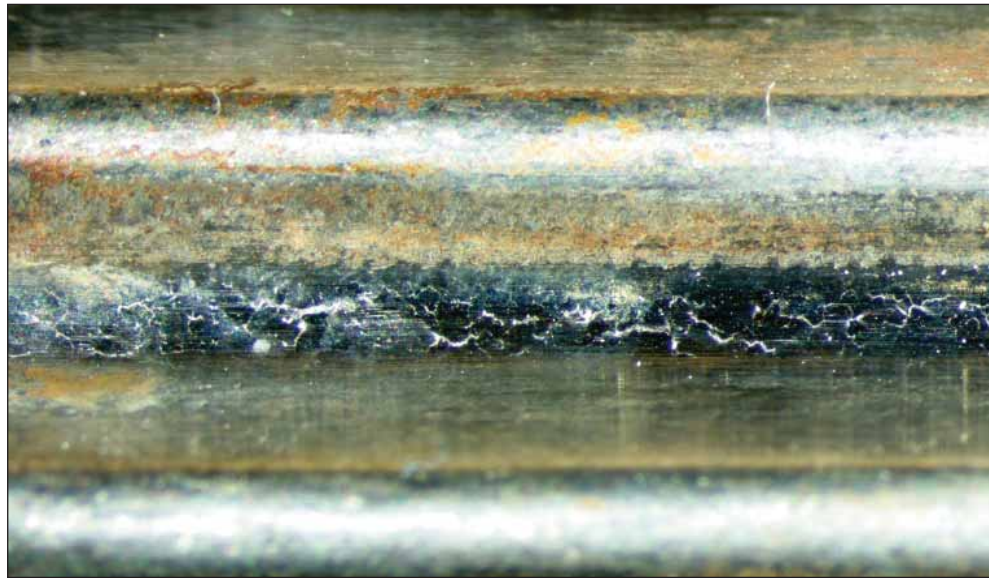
Carbonaceous, sooty deposit over a turbine blade fracture surface
